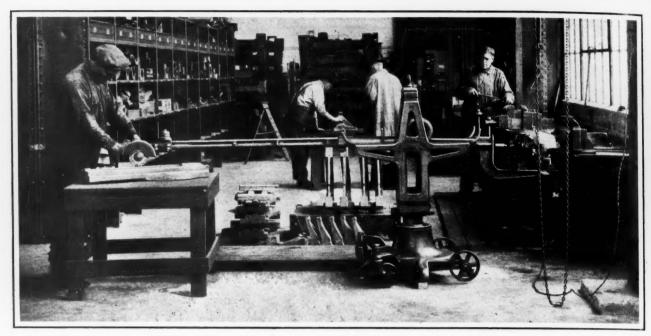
Portable Grinding Equipment Employed in Snagging Castings
